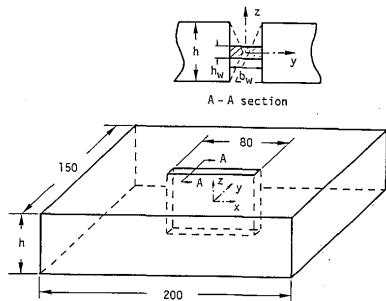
Oblique Y-groove weld cracking test specimen
